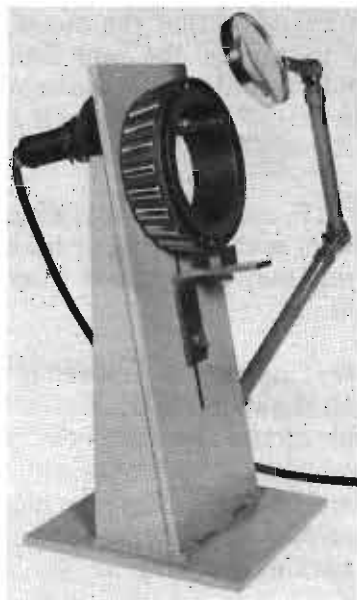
Checking Cone Bore With Dial Bore Gauge
